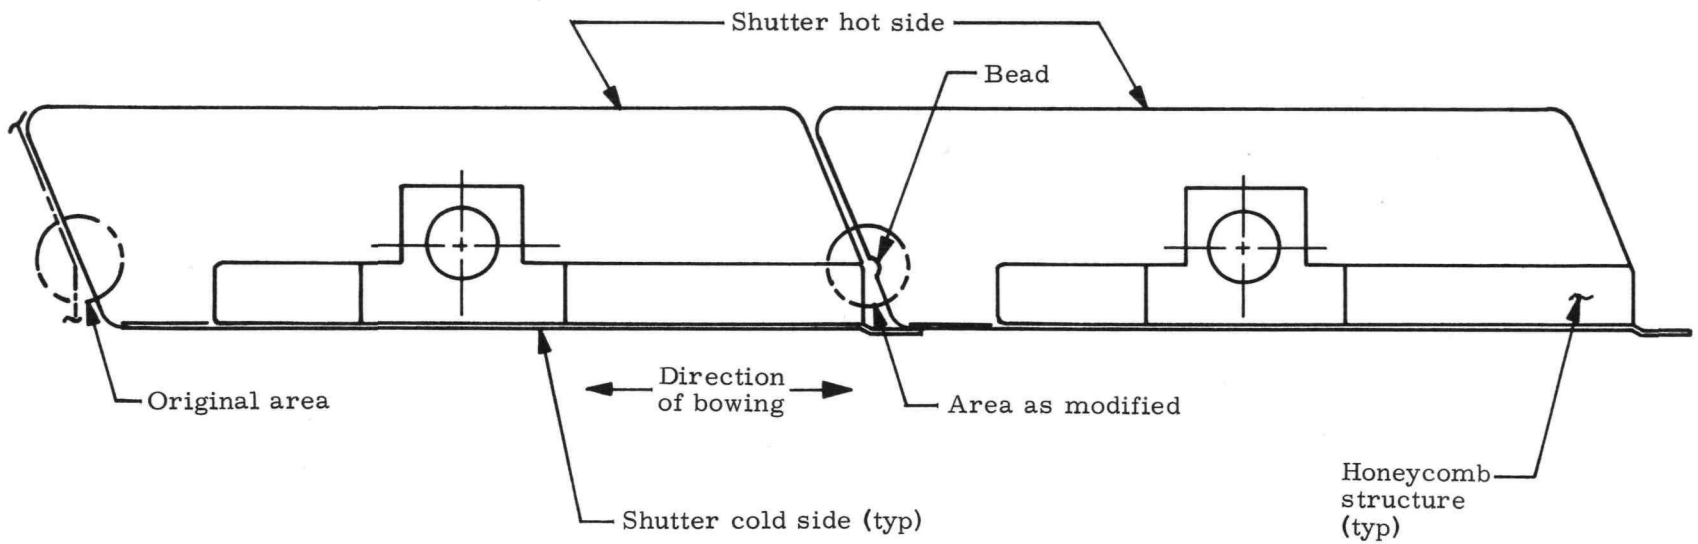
MODIFIED SHUTTER CONFIGURATION TO ELIMINATE TOLERANCE PROBLEM
